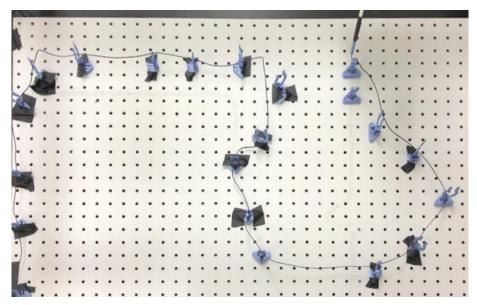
Overhead view of completed demonstration harness showing various clip designs and clip placements. The extruder tube may be seen in the top right corner.
